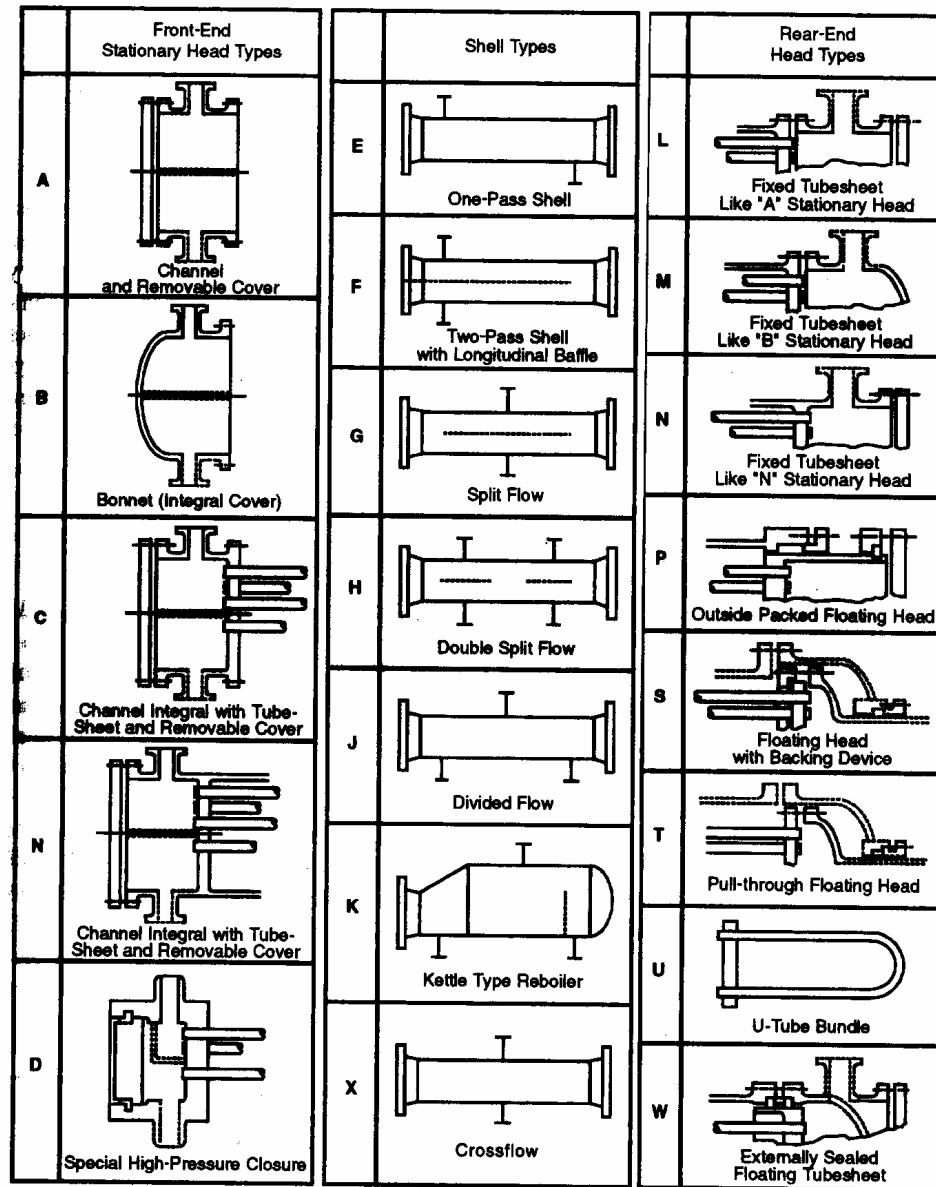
Standard shell types and front- and rear-end head types (From TEMA, 1999).
